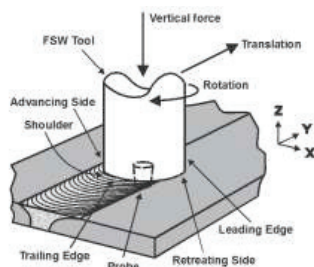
Schematic diagram of the friction stir welding process [2]
